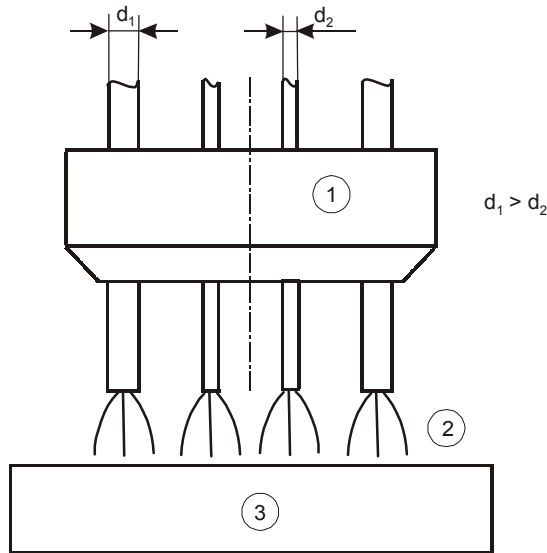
Contact tube for surfacing with wires of different diameters; d - wire diameter; 1 - contact tube; 2 - arcs; 3 workpiece
